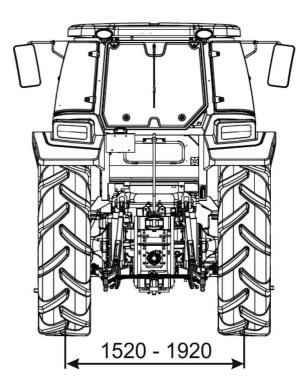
Wheel track of tractor's front and rear drive axles.
